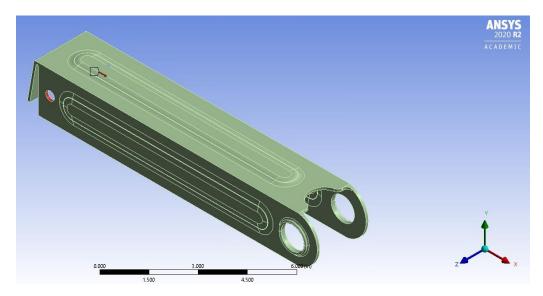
CAD Rev 1: Compressive Force at Bolt Holes
